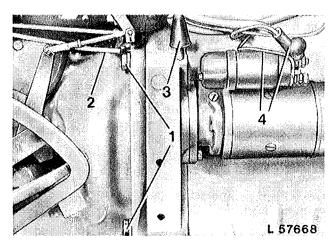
Separating between Engine and Clutch Housing, R.H. Side
